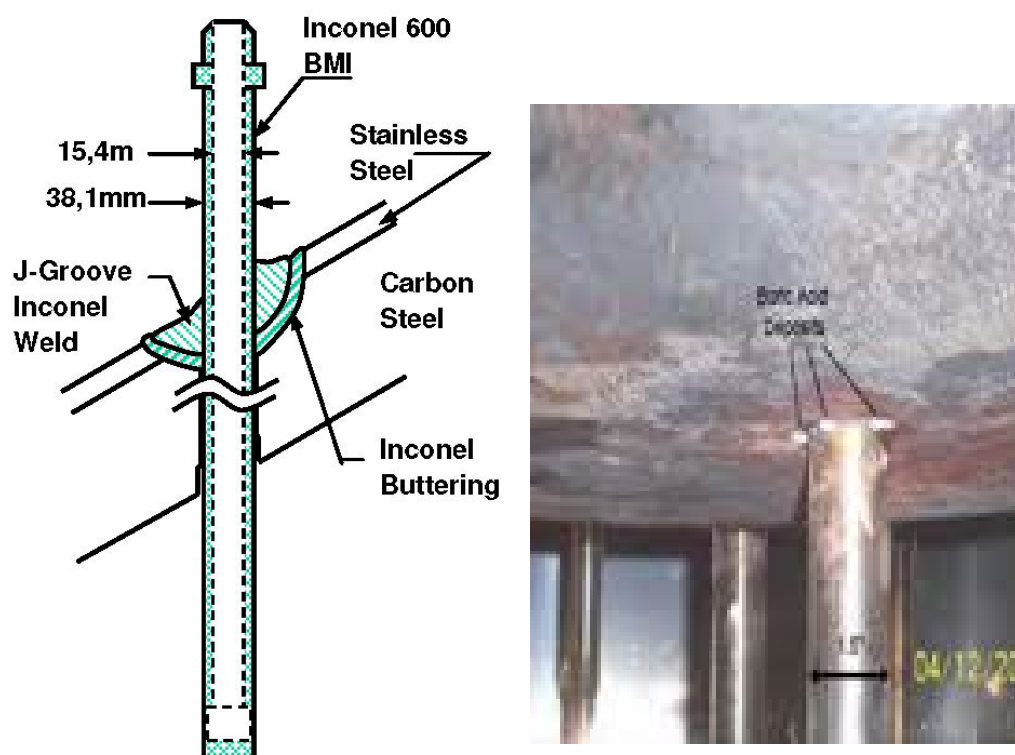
Bottom Mounted Head Instrumentation Nozzle
